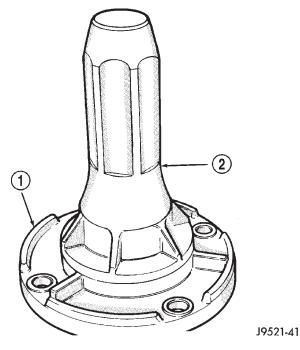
Front Bearing Retainer Seal Installation 1 – FRONT BEARING RETAINER
